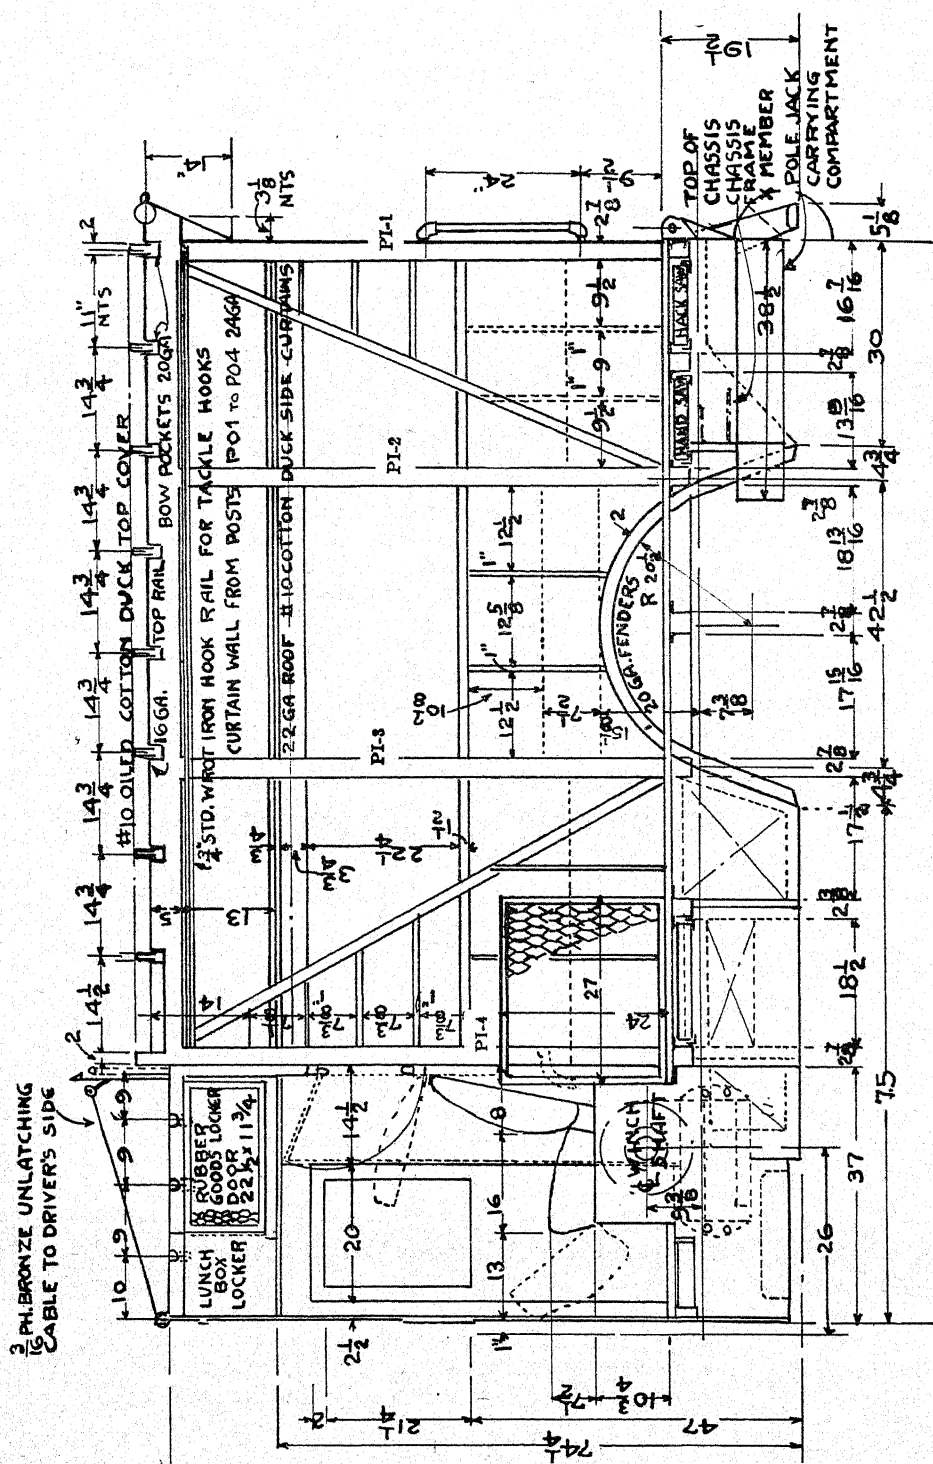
Elevation view of power company line truck designed for arc welded construction.
